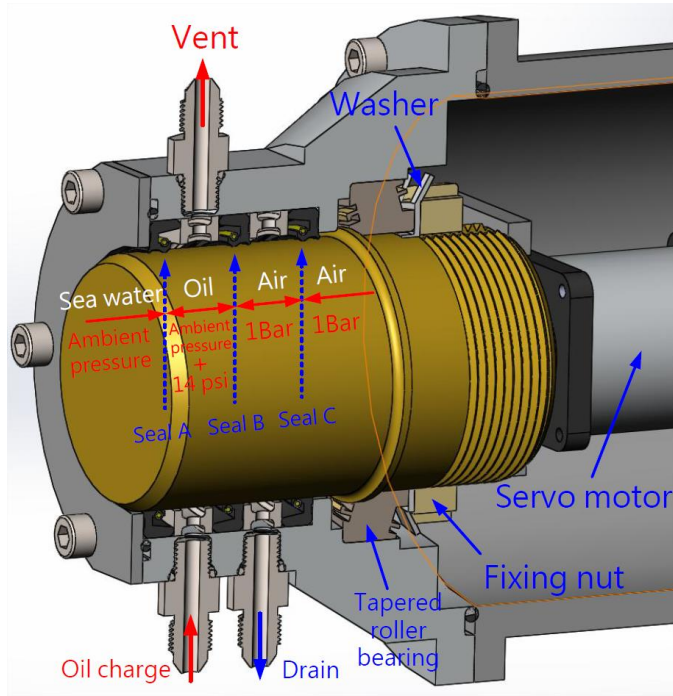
The section diagram of the shaft seal module. 3 shaft seals are used to isolate sea water/oil, oil/air and air/air. The tapered roller bearing could minimize shaft rotating deviation and reinforce the shaft axial and radial loading affordability.
